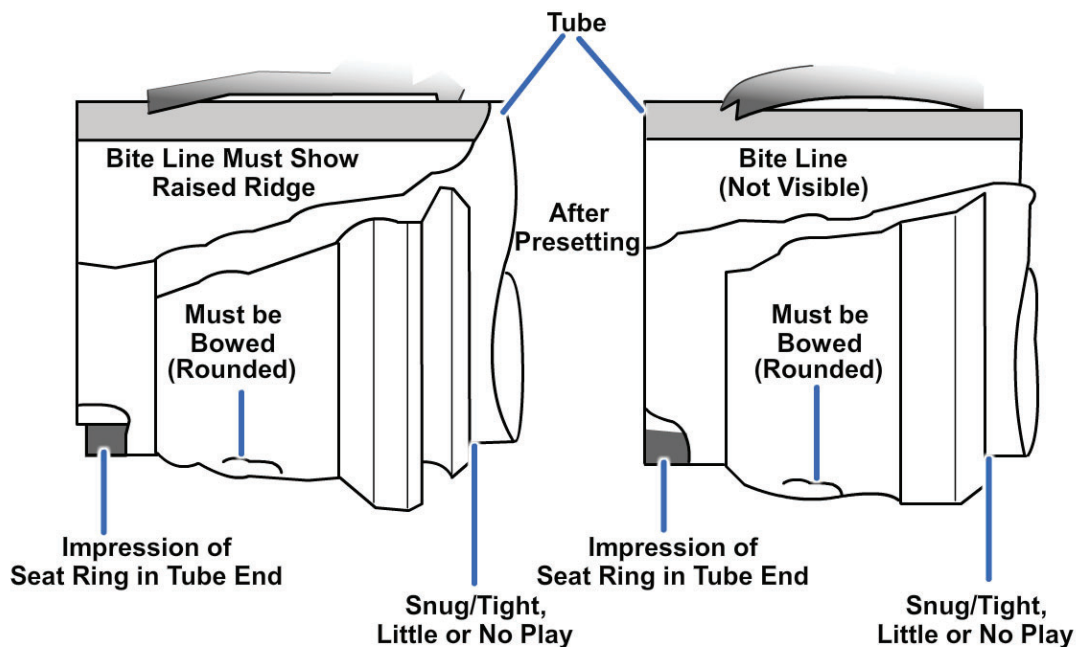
Ferrules installed on tube, preset and removed for inspection.
